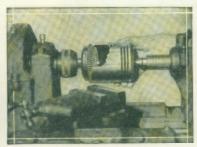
Truing the Inside Bevel Edge of Piston Skirt. See Page 27.
